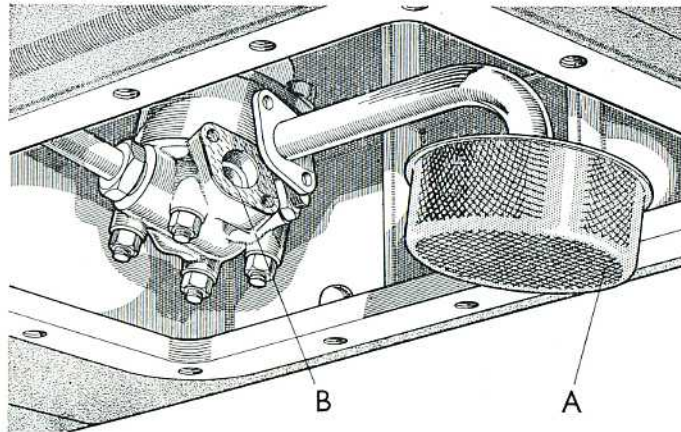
/8. REMOVING THE ENGINE OIL PUMP FILTER
